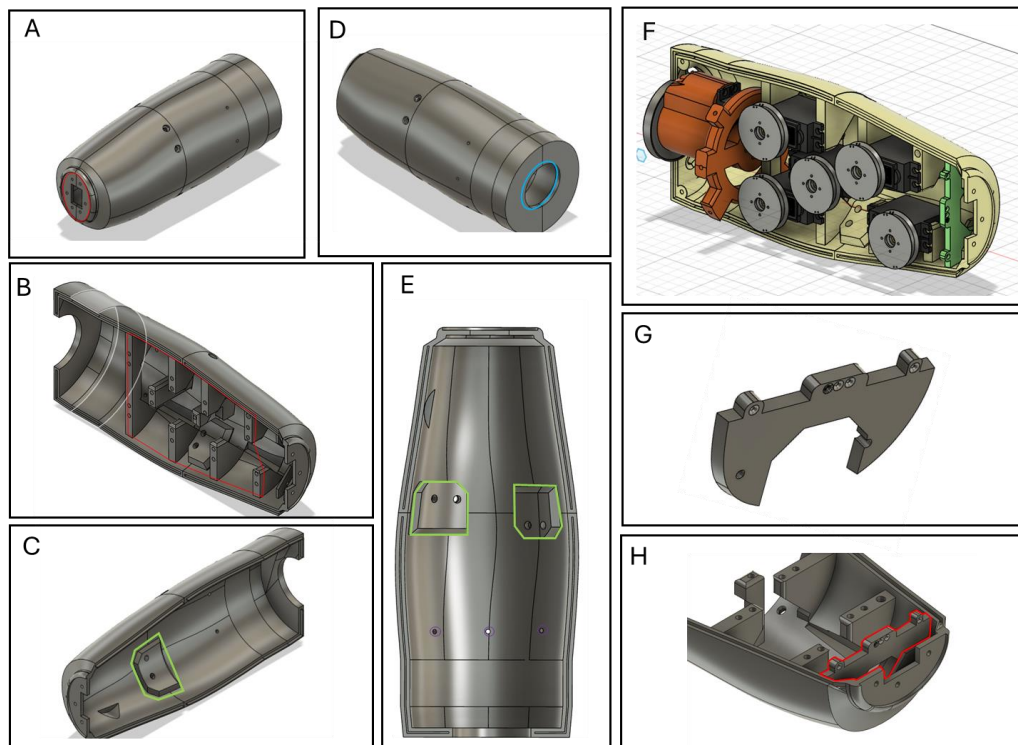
Forearm structure CAD model (A) closed system front view (B) upper part (C) lower part (D) close system back view (E) interior cover connectors (F) full assembly (G) string separator (H) string separate in place.
